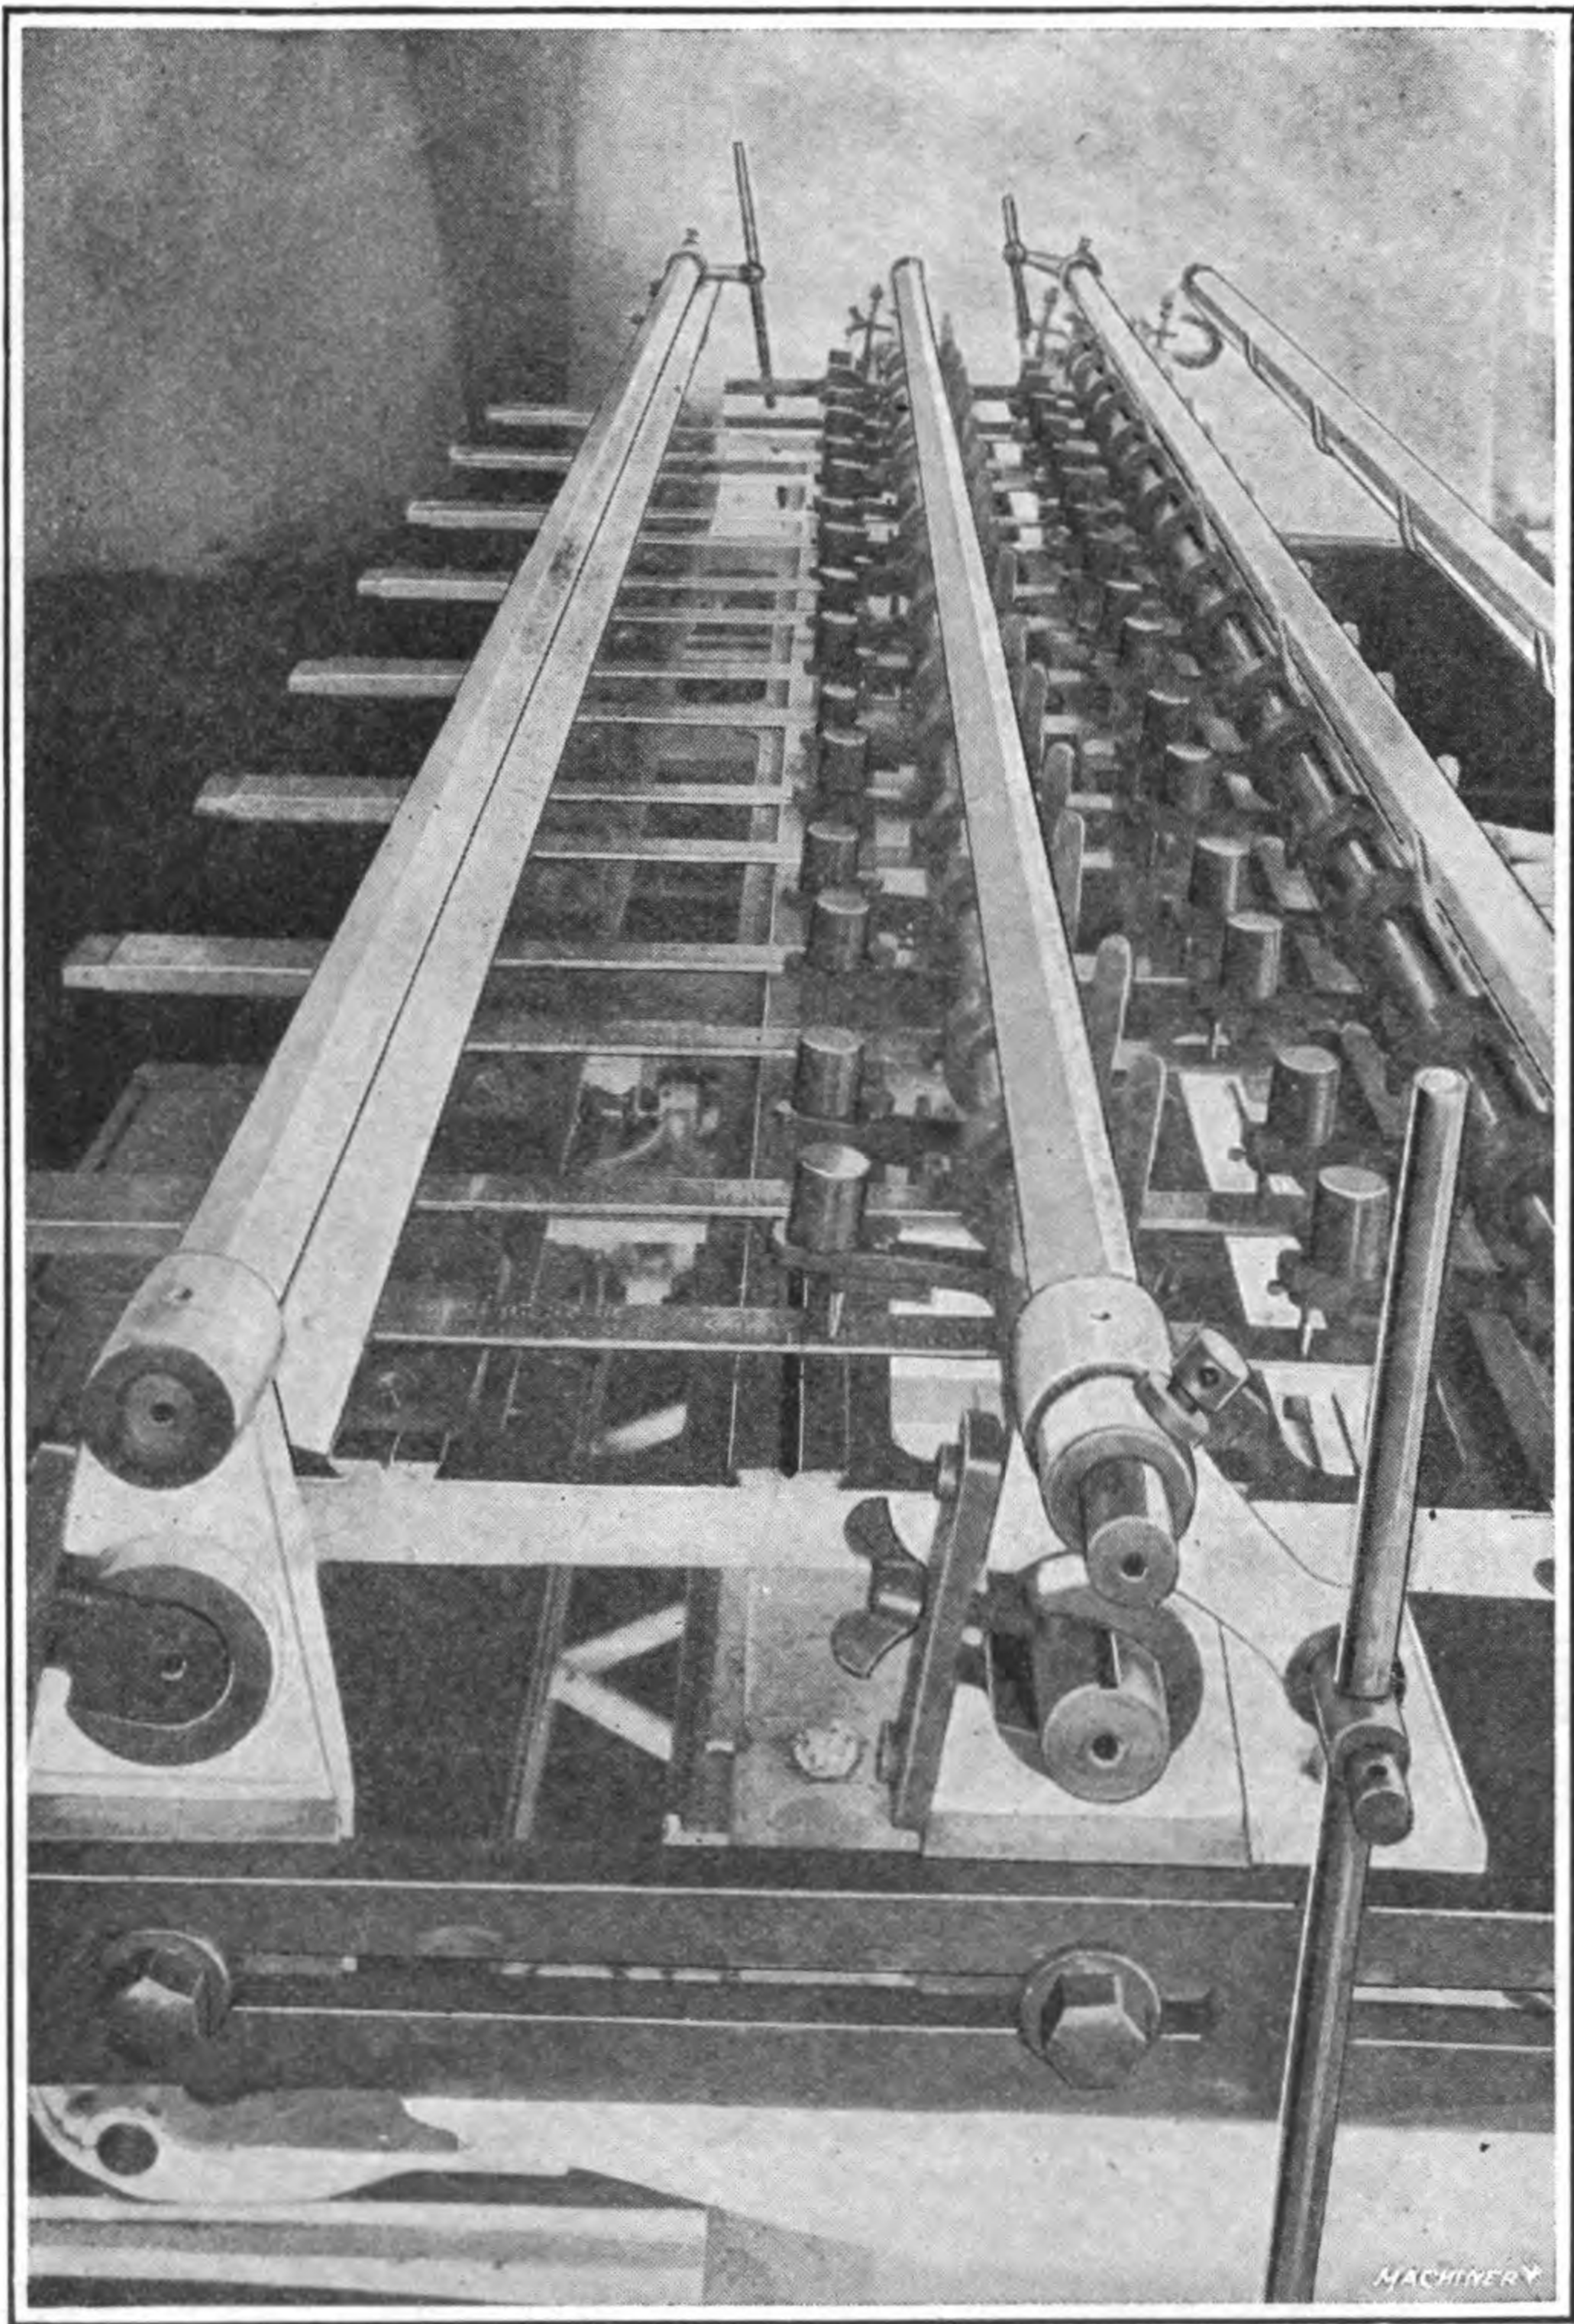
Close View of Work-holders and Graduating Tools on Hope Machine
